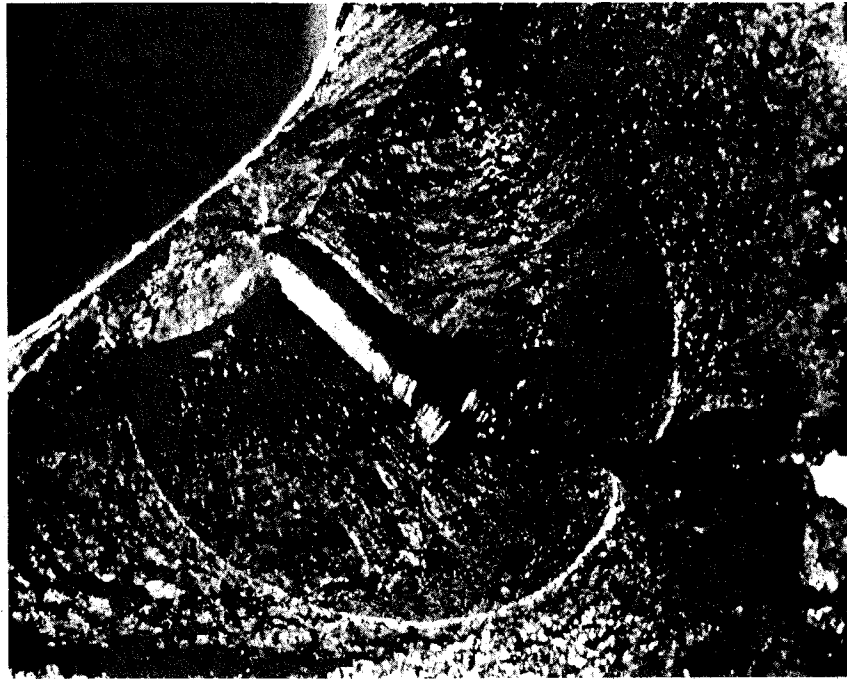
Small crack with penetration to the fillet-weld surface ( $\sim x11$ )
